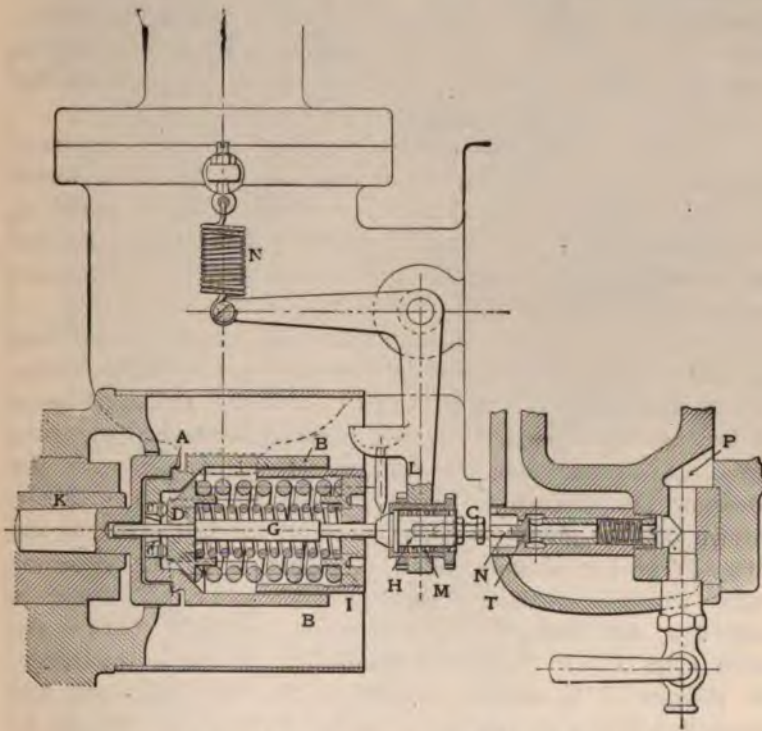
DE LAVAL GOVERNOR AND VACUUM VALVE
